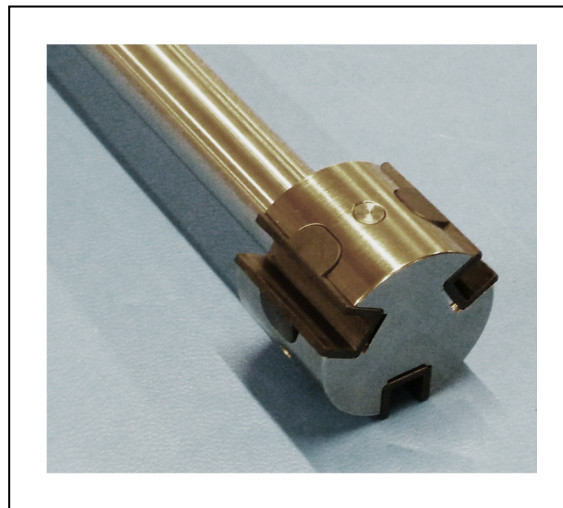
Center Shaft Bushing-holding Fixture, with Bushings
